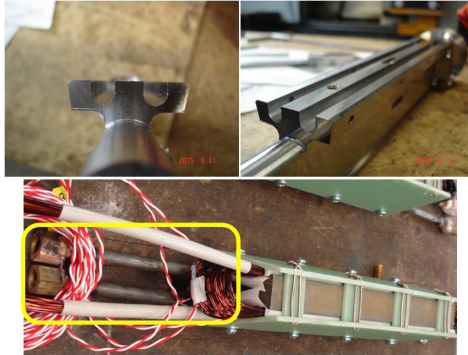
Second design of the test sample with cut grooves (top) and the finalized motor-rette before impregnation with silver welded metal tubes acting as cooling ducts (marked in the yellow box) (bottom)
